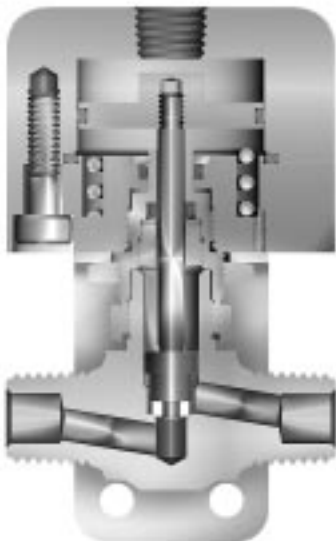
VQ-11AO Series Actuated Valve Cross Sectional View
